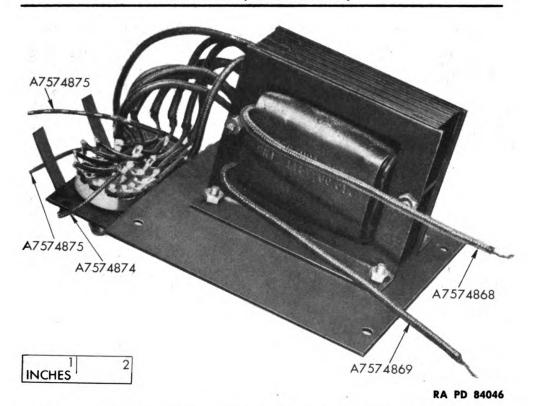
Transformer Plate Assembly Showing Transformer Leads Connected to Lamp Switches
